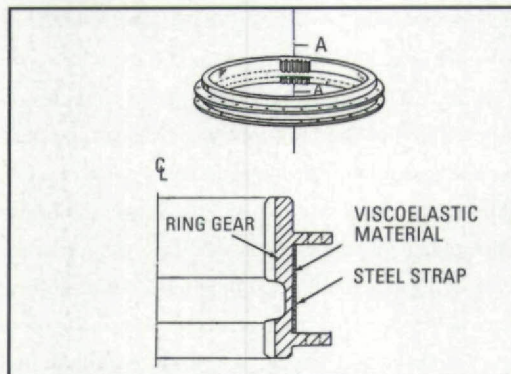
Thin elastomeric coating on gear web with steel constraint.
